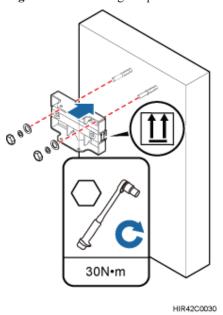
Installing the pole installation bracket on the expansion anchor bolts
